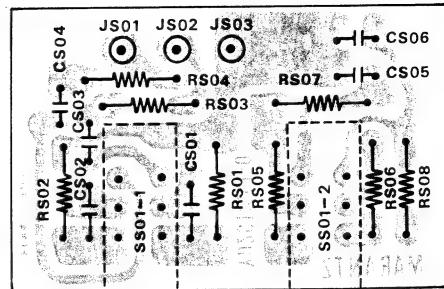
Loudness and Hi Filter Switch Assembly PS01 Component Locations
